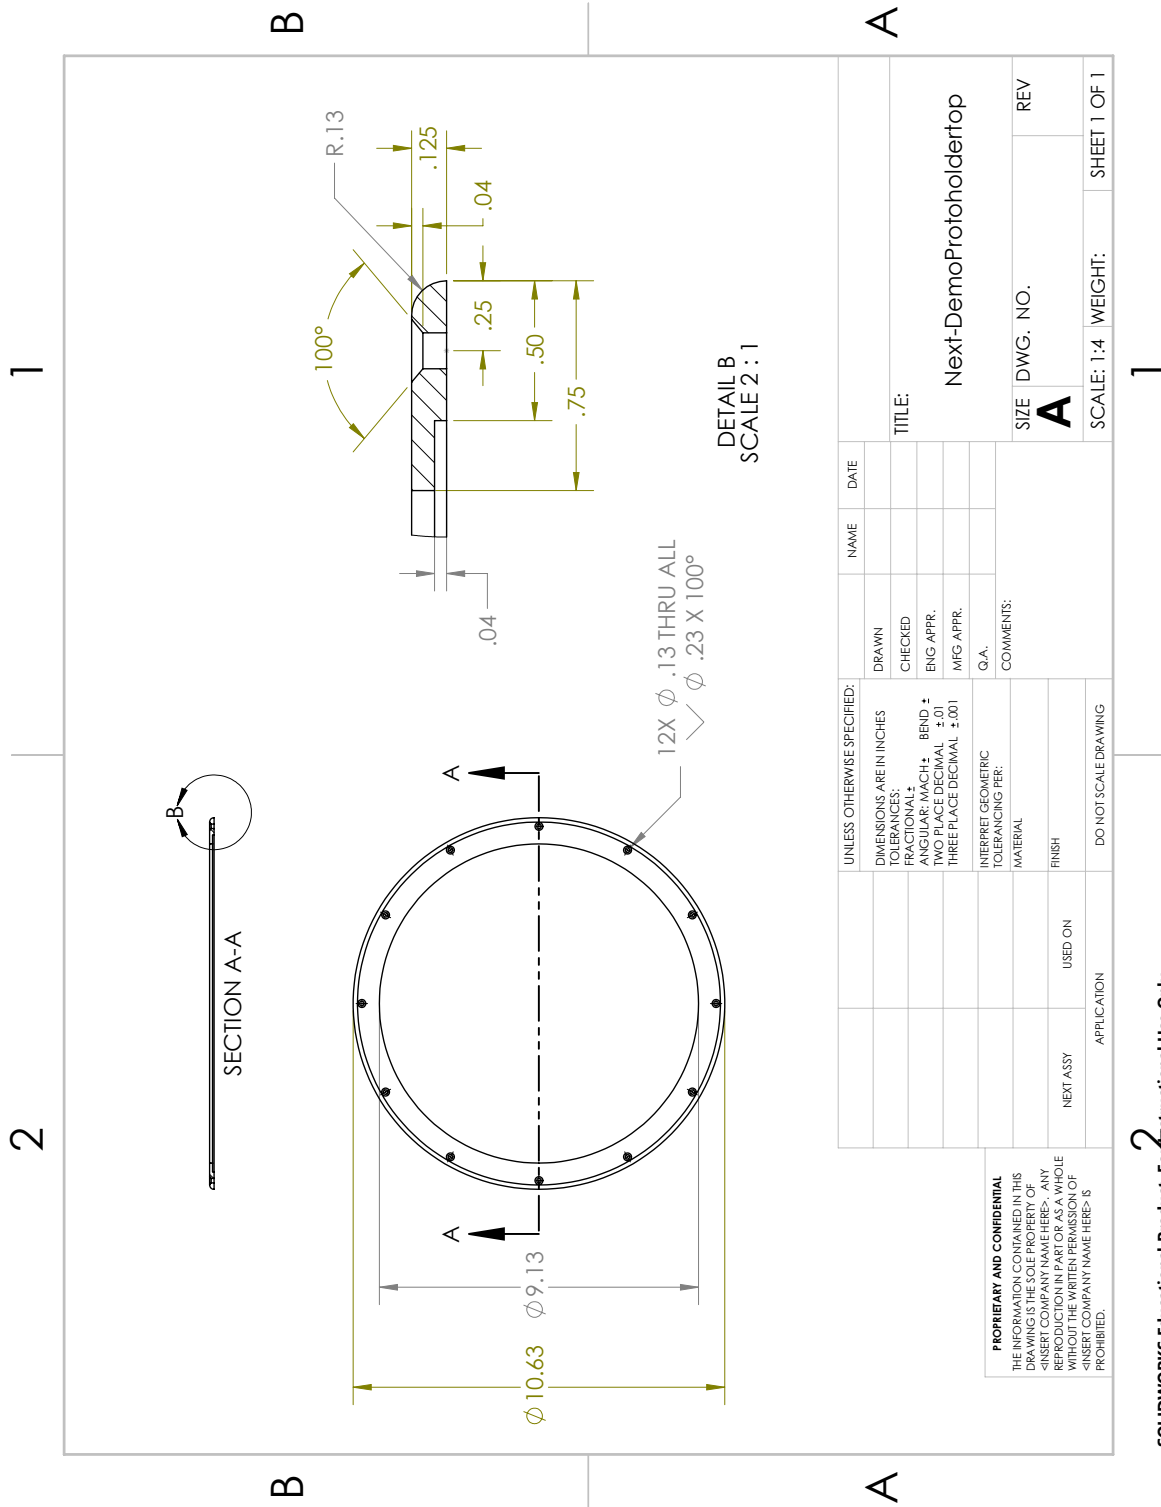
Machine drawing for manufacturing the Anode base ring for DEMO++.
